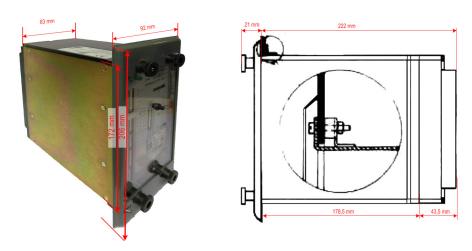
Relay 7000 - Case EDPAR R2 - Outside dimensions
